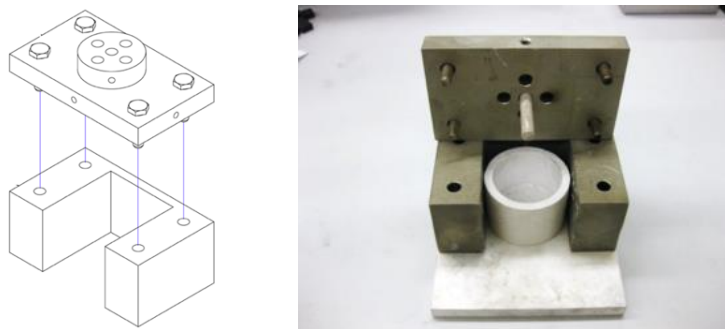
5 Stainless steel BN-rods holder (left). The picture on the right shows the holder, the BN rod, and the BN mold.
